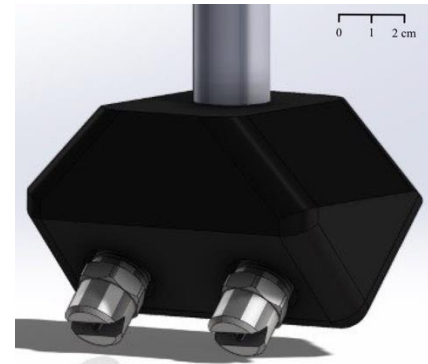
Nozzle Housing CAD Drawing. CAD drawing of designed nozzle housing structure that attaches to a protective hose that runs the paint lines through to the polycarbonate box and reservoir.
